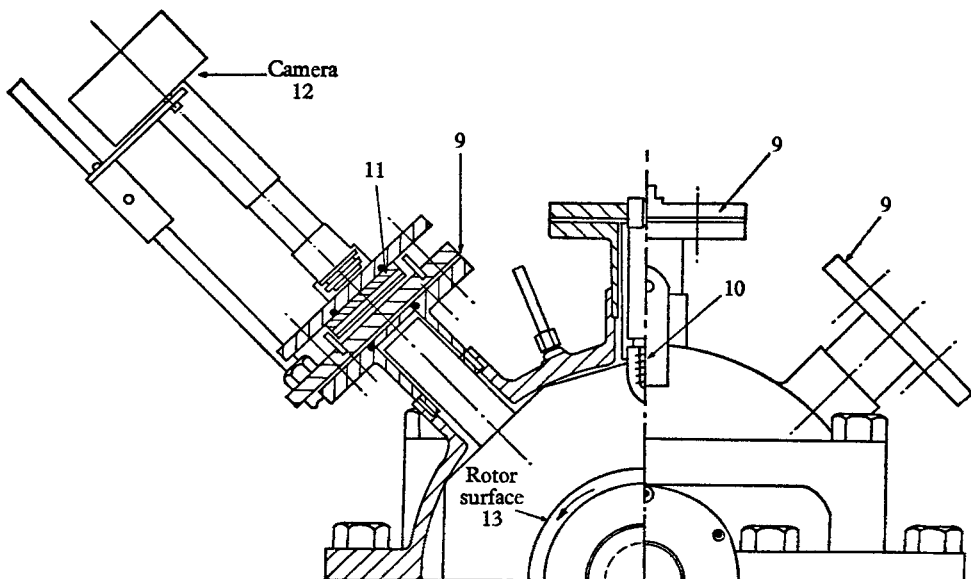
Top half of steam enclosure showing position of camera relative to the rotor surface.
